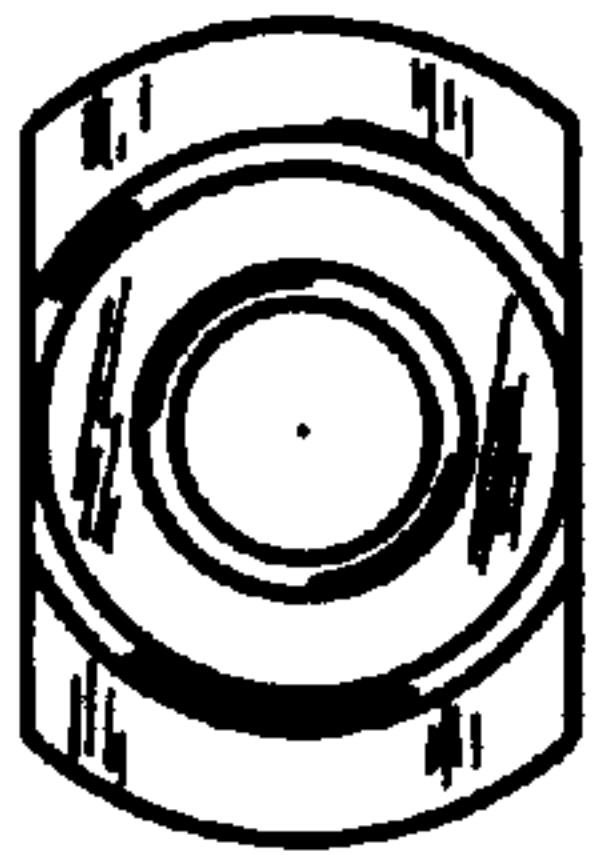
is a perspective view of a guide pin and bearing for a disc brake showing our new design; FIG. 2 is a side elevation view of FIG. 1; FIG. 3 is a rear end elevation view of FIG. 1; FIG. 4 is a top elevation view of FIG. 1; and, FIG. 5 is a front end view of FIG. 1.
